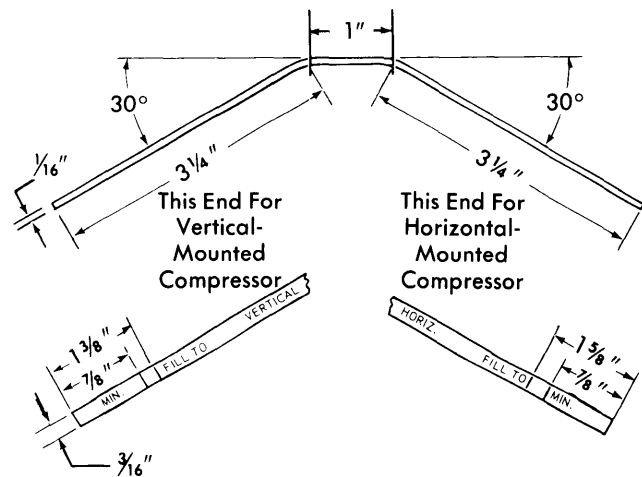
Tecumseh Compressor Oil Level Dipstick
